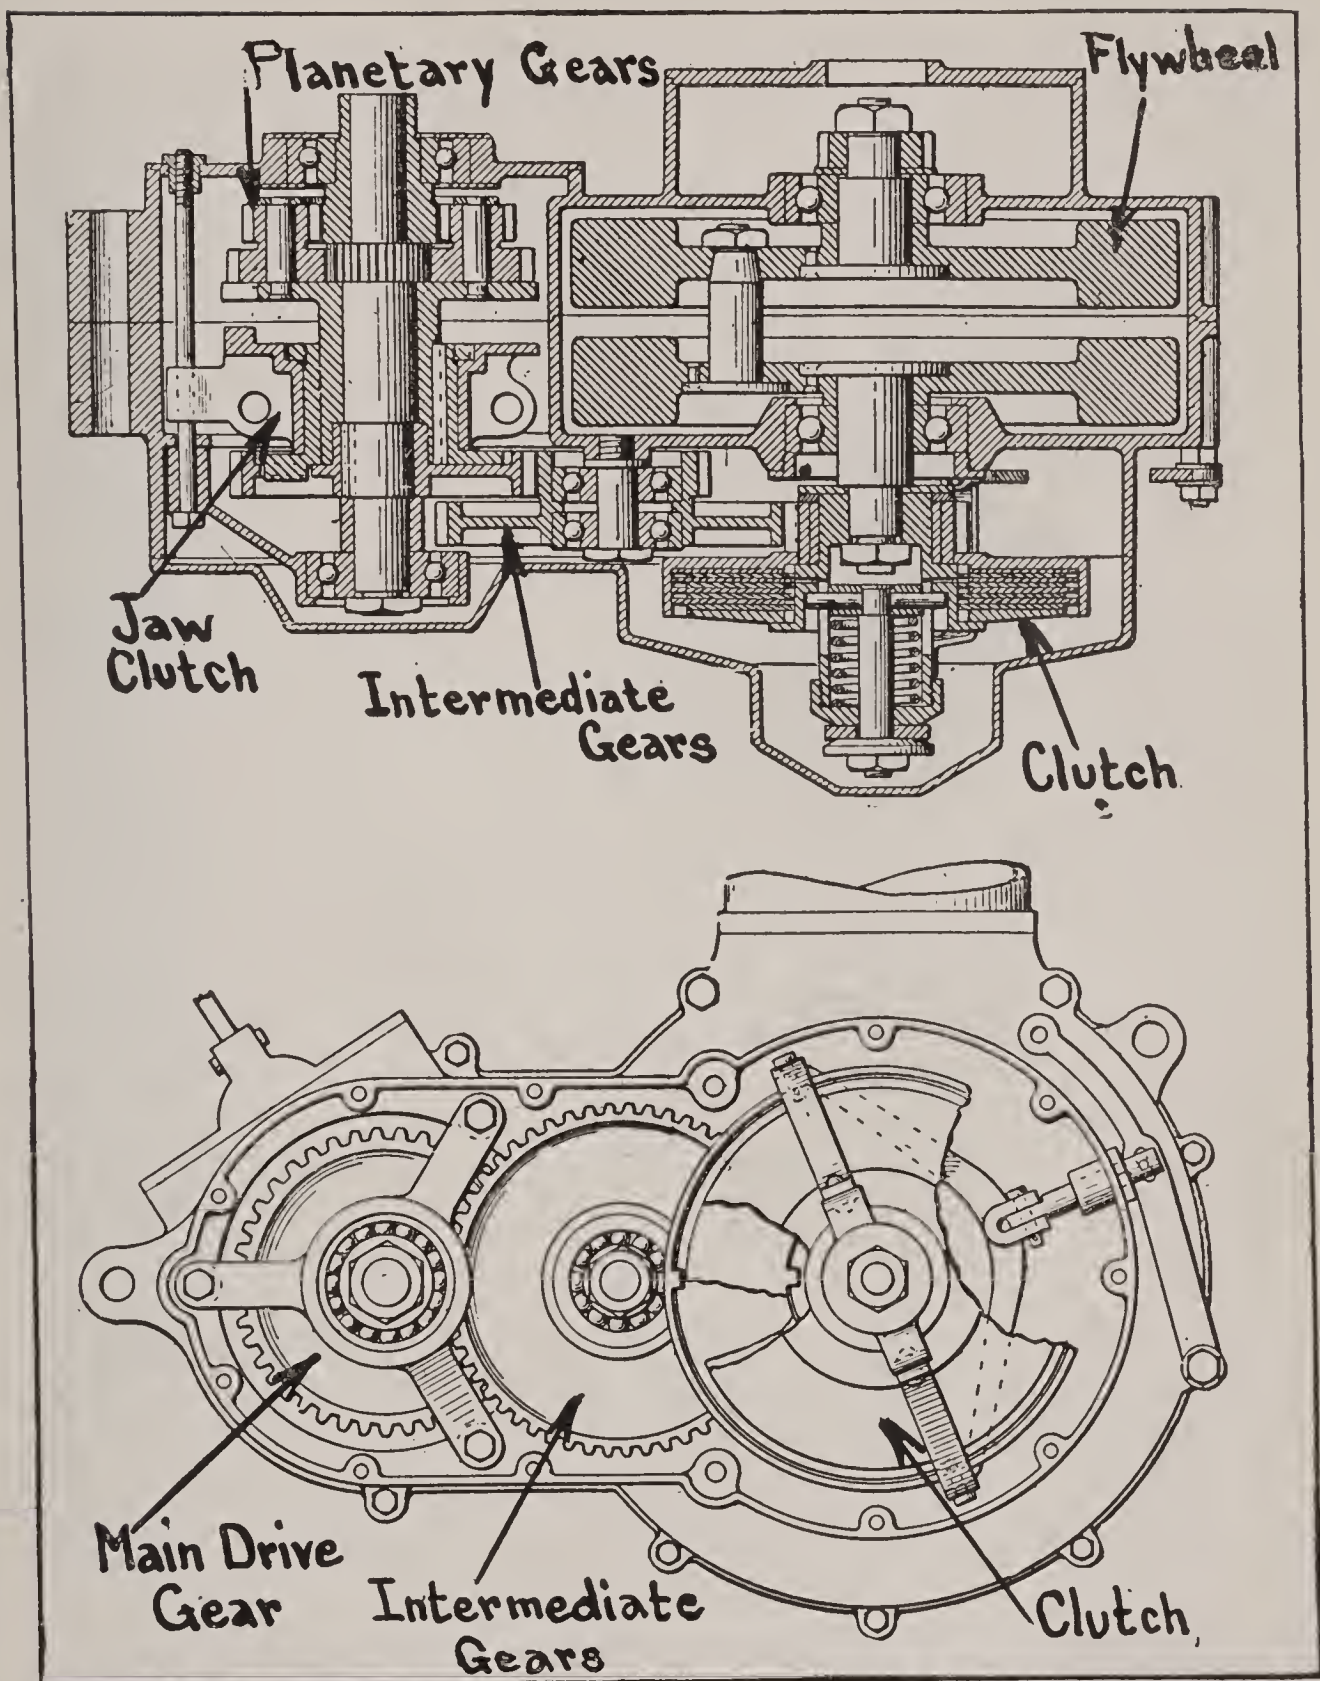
Views Depicting Construction of the Minneapolis Unit Power Plant and Gearset.
